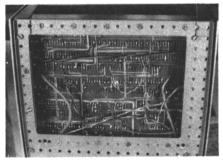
bottom view of the universal P.C. board wine is 30 AWG
